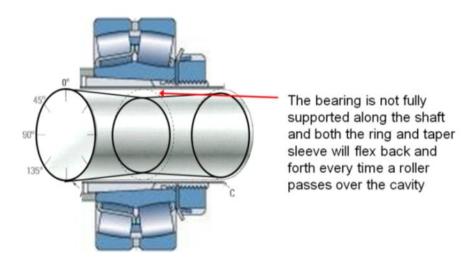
Roller Bearing Reliability is Compromised by the Shaft Condition
